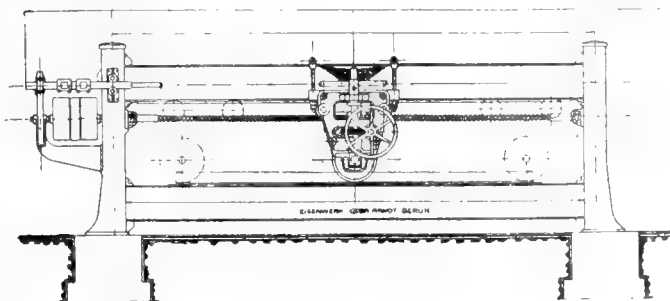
ARNDT'S SHEET ROLLING MACHINE.
